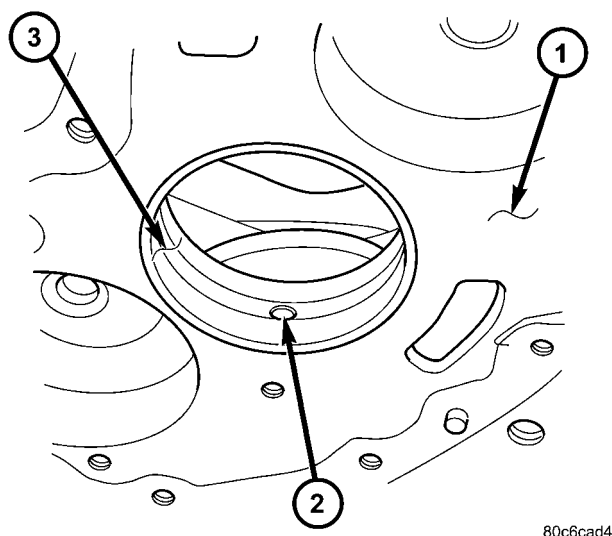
FRONT MAIN BEARING ALIGNMENT
